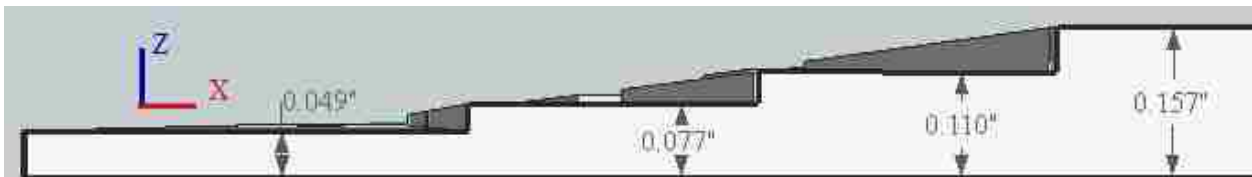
Cross sectional view of the 20x20 cm² upper trimmer lead plate in the cross-plane dimension illustrating the thickness values of the plate.
